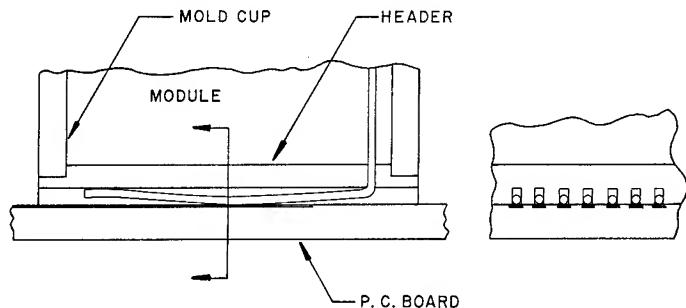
Detail of Design No. 3 when mated. Note wire to printed wiring contact in right section.
